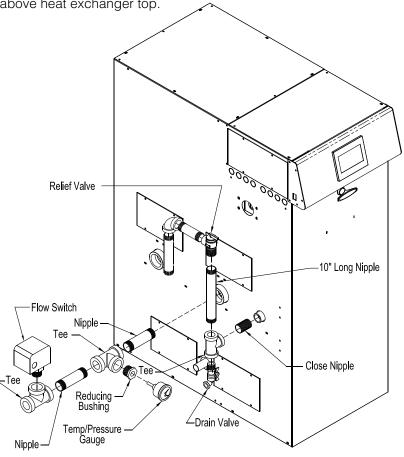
Factory Supplied Piping and Trim Installation - APX425C
